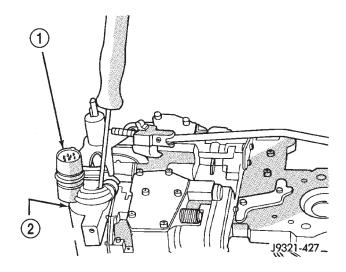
Solenoid Harness Case Connector Shoulder Bolt
